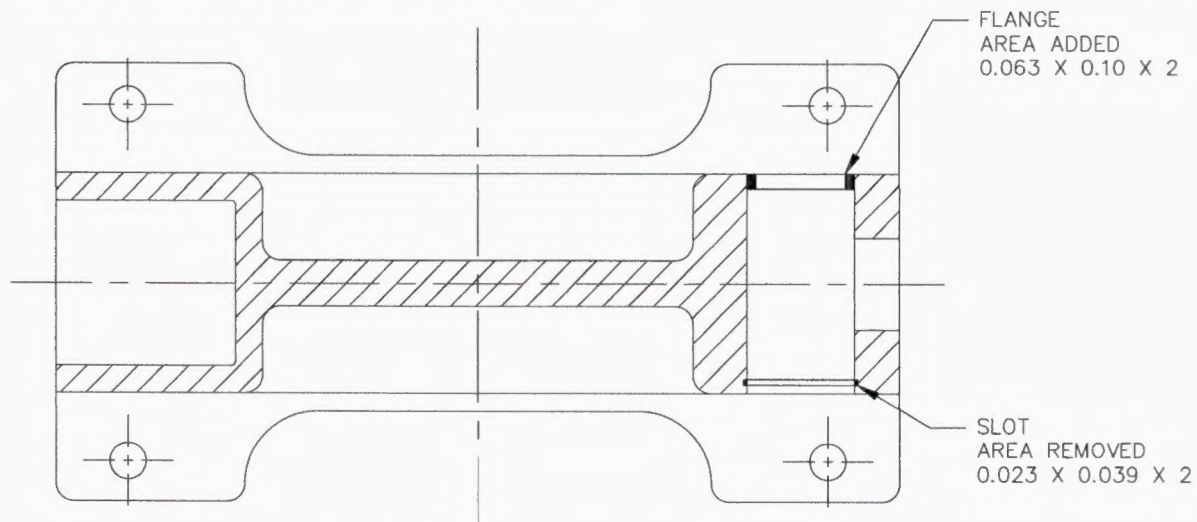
Landing Gear Fitting Section Through Barrel Nut Hole
